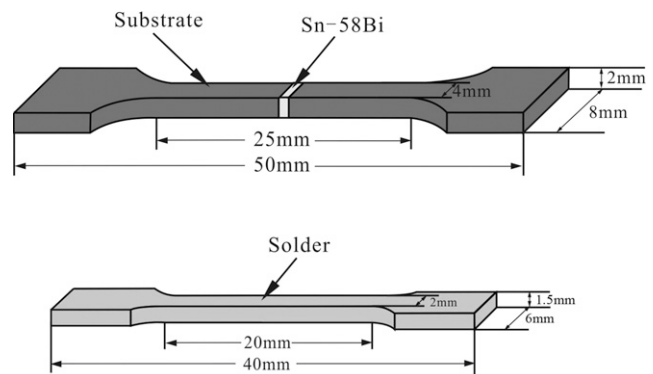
Shape and dimensions of the tensile and fatigue specimens.
